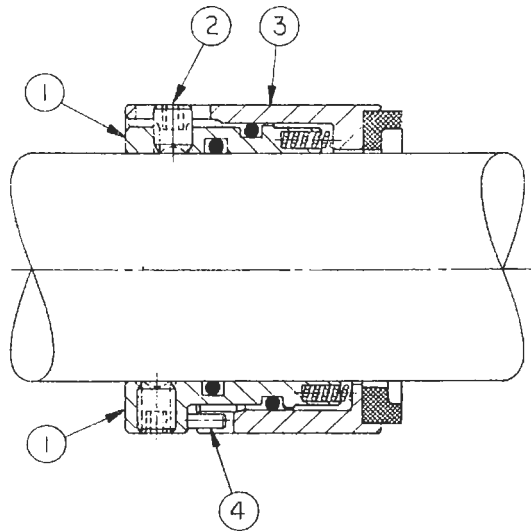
Mechanical seal face clamping methods devised to reduce risk of distorting rotating face.
